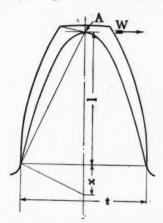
Tooth outline of 18 tooth long addendum pinion
